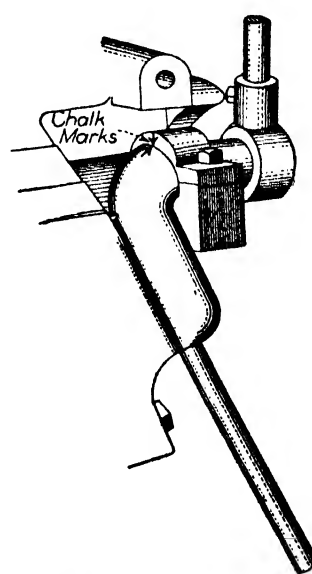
Bending Leaf Raised until Chalk Marks Coincide
